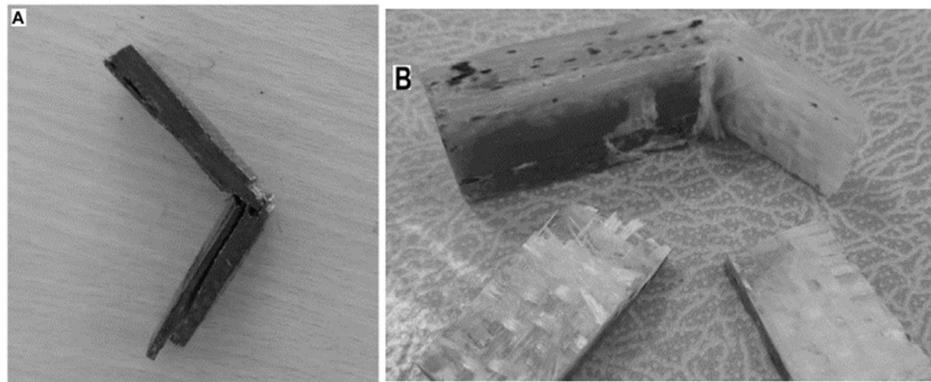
(A) Carefully constructed top view of the final CFRP test specimen. (B) The obtained GFRP test specimen seen from an isometric viewpoint.
